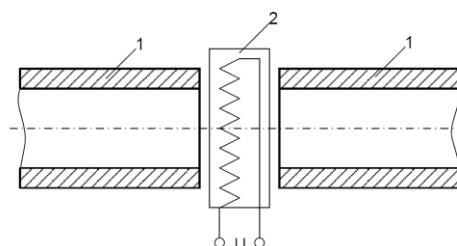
Butt welding of polymer cords (Sikora, 1993):
